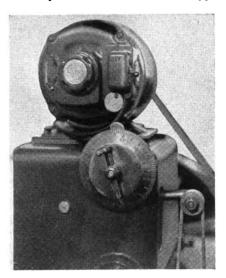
Close view of setting dial on Sunnen Honing Machine.
